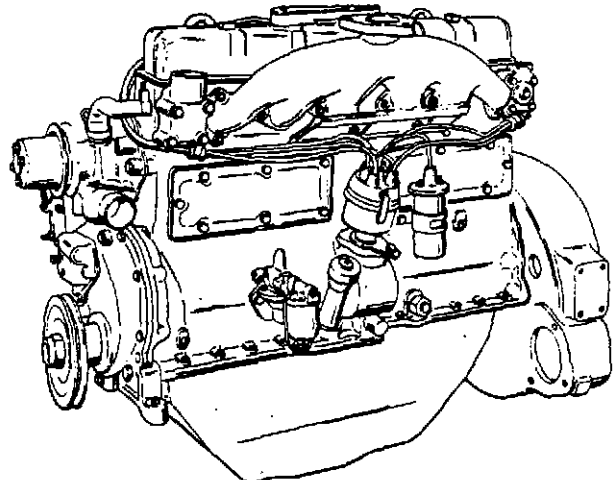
Six-Cylinder Engine With Distributor Ignition, Left-Hand Side
